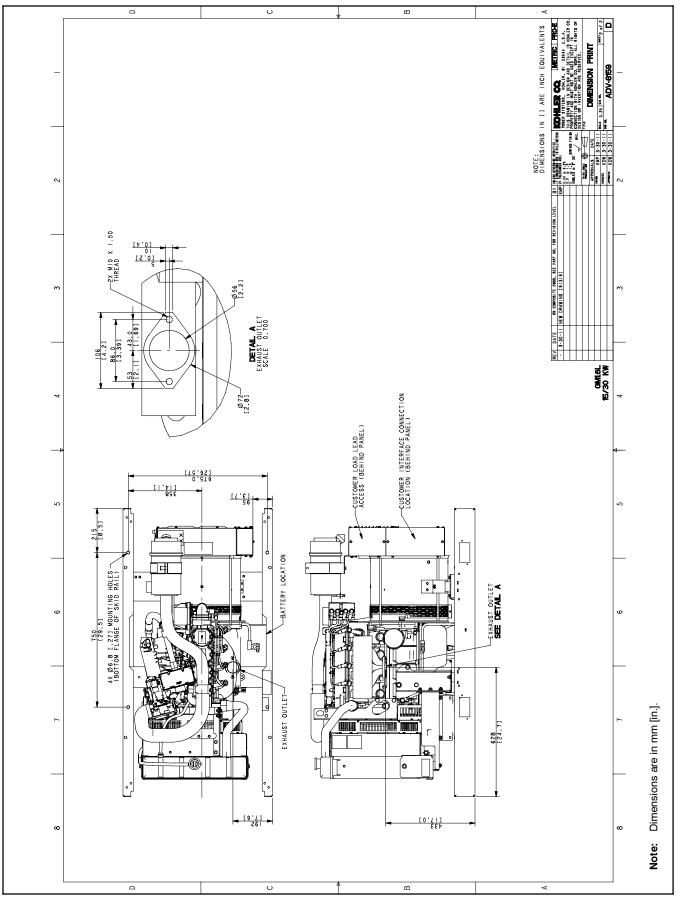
Dimension Drawing, ADV-8159, Sheet 2, Generator Set with Customer Connection Box
